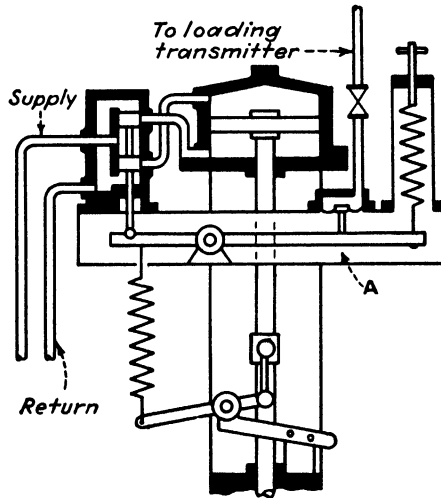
Pilot-valve-controlled hydraulic-piston motor furnishes power in two directions. (Courtesy of Republic Flow Meters Co.)
